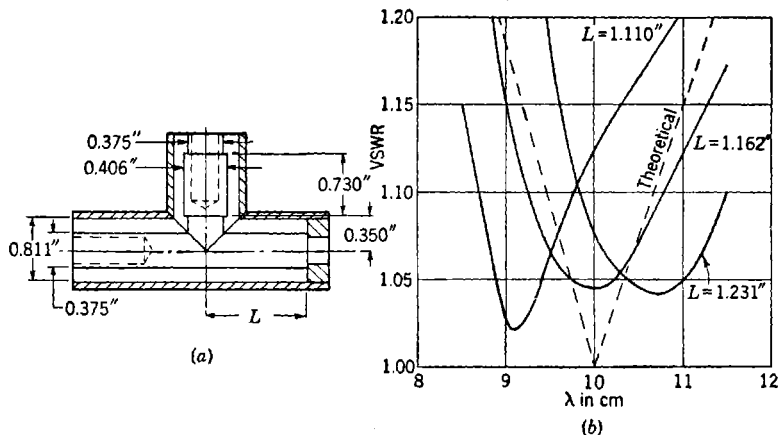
Stub angle matched by sleeve transformer. (a) Design. (b) Performance.
